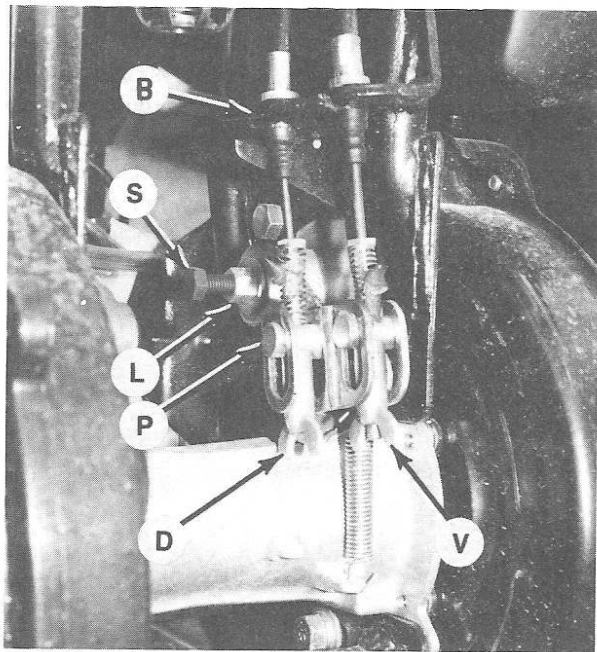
View of rear brake cable components used on later models. Note that adjusting nuts are located at bracket (B) on early models in place of adjusters (D and V) used on later models.
